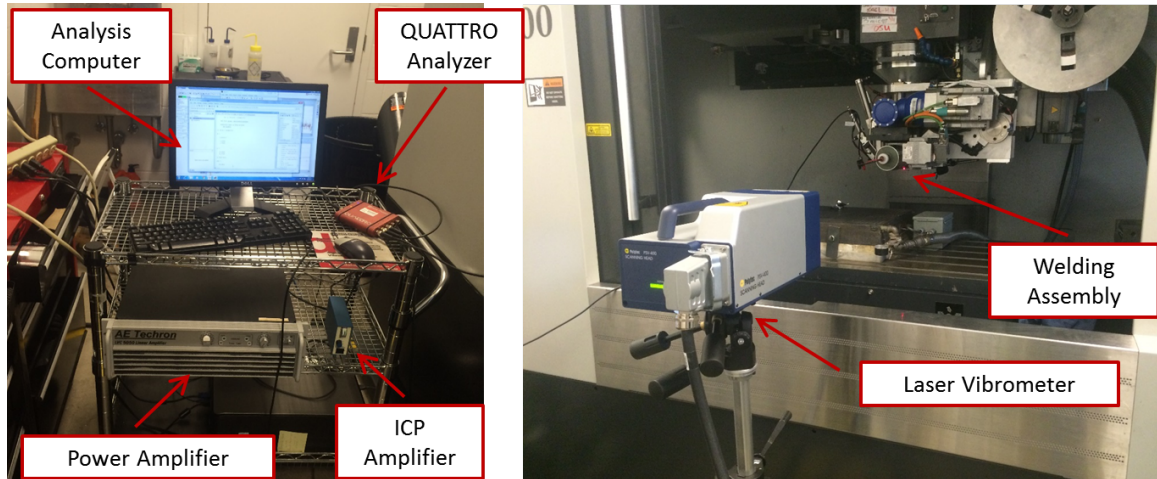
Approach and equipment used to measure experimental FRF measurements of weld assembly. Characterization was done inside the UAM machine to emulate operating boundary conditions.
